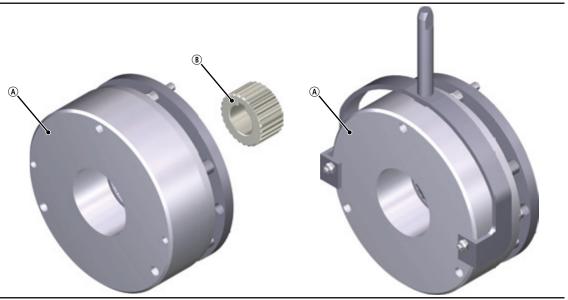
Spring-applied brake INTORQ BFK457– Compact version
